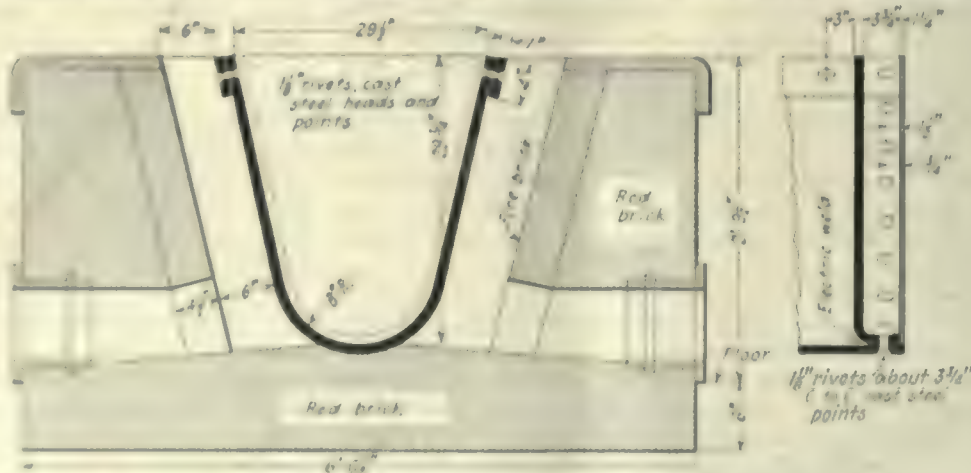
SECTIONAL VIEW OF U-SHAPED KETTLE AND METHOD OF INSTALLATION
